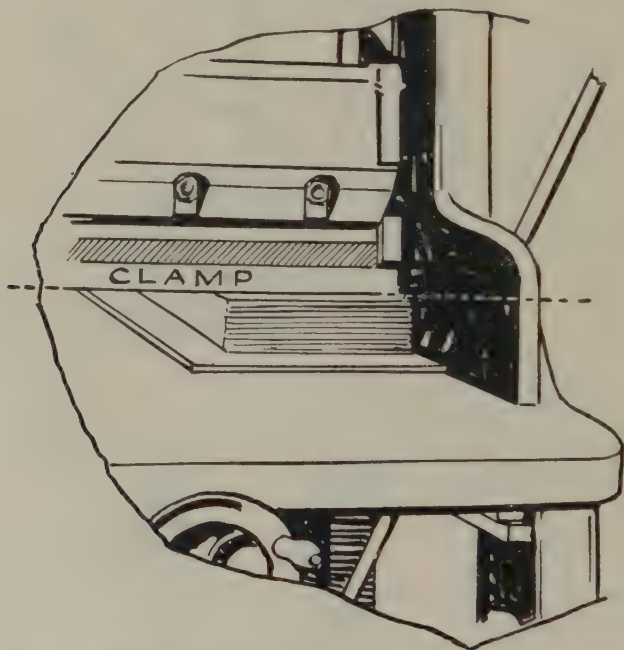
BOOK IN POSITION AND CLAMP SET FOR MAKING CUT
